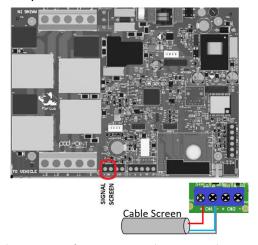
PCBA Clamp Connection - Location J14 - C#1
